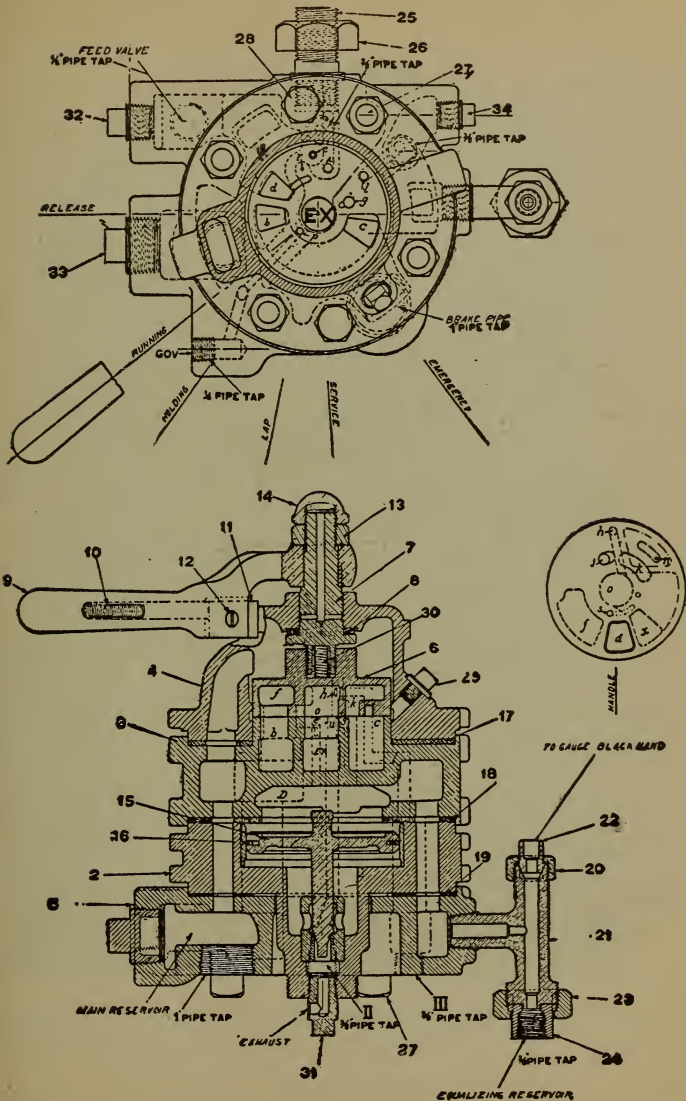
The H-6 Automatic Brake Valve Cross Section.
